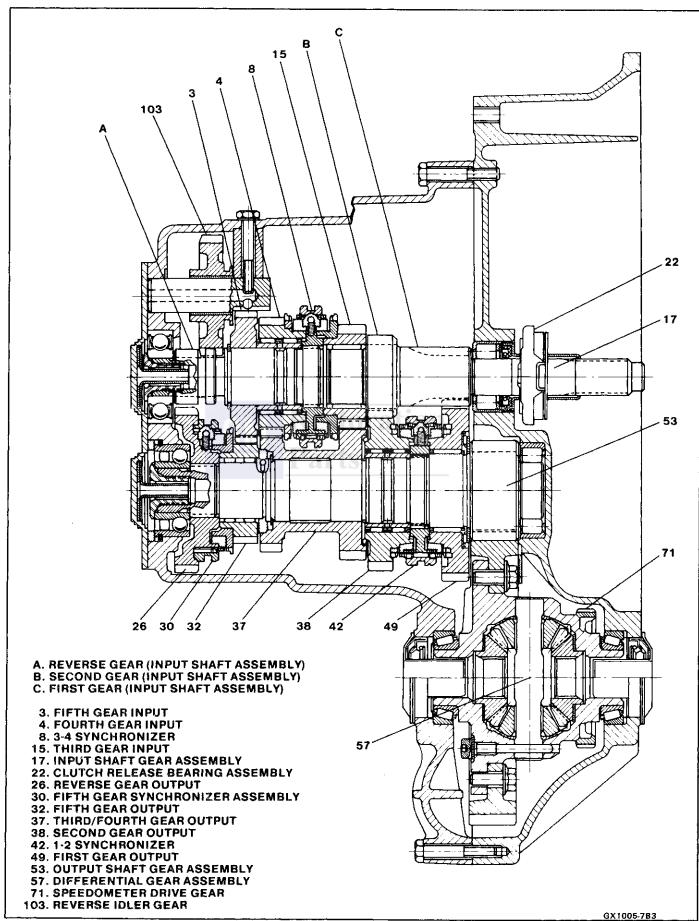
Cross Section View - Muncie 282 (5-Speed) Transaxle
